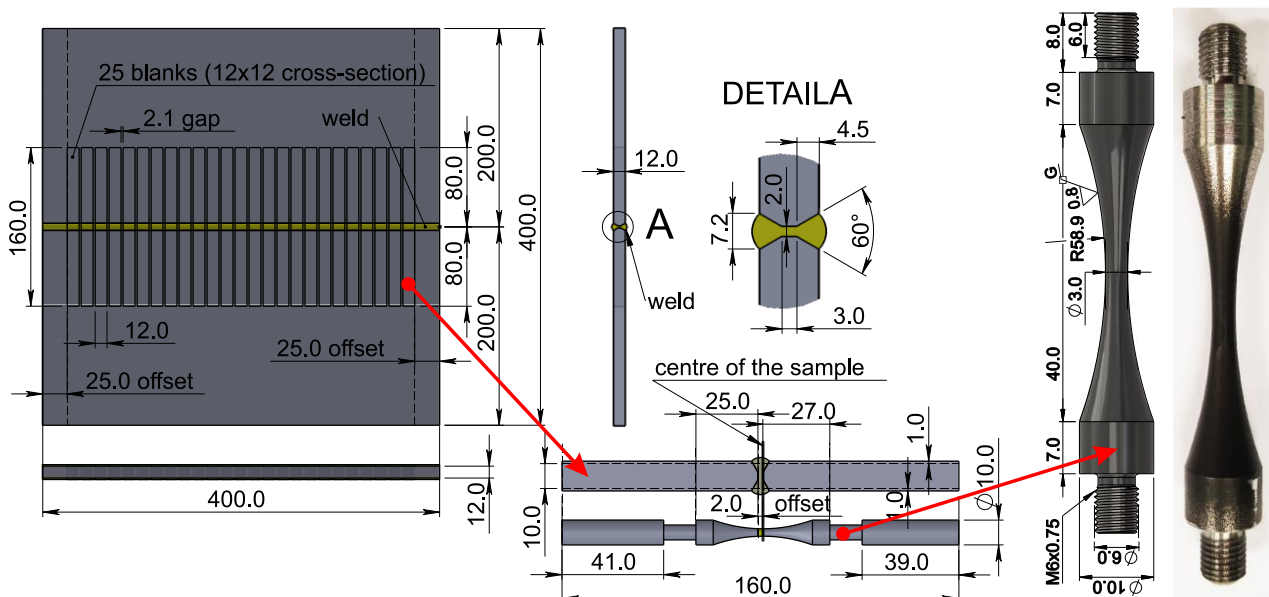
Manufacturing of USF testing samples from the plates welded with a double-V butt joint.
